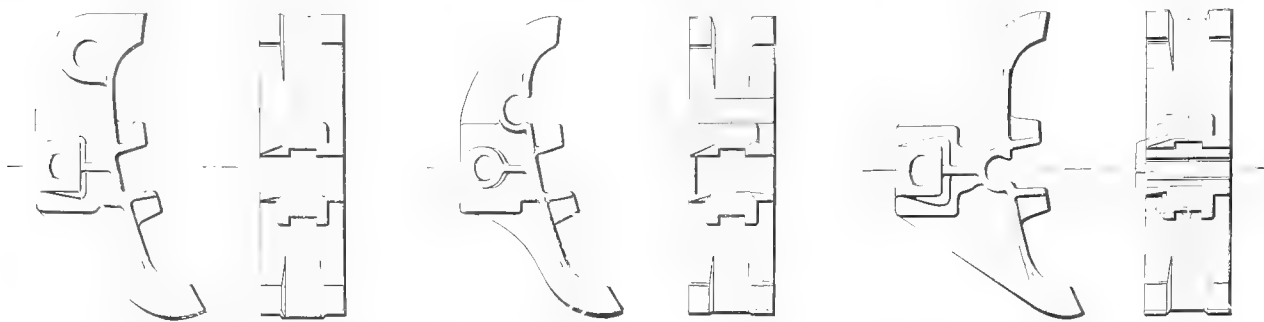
Brake Heads for Ajax Brake Beams. American Steel Foundries.
